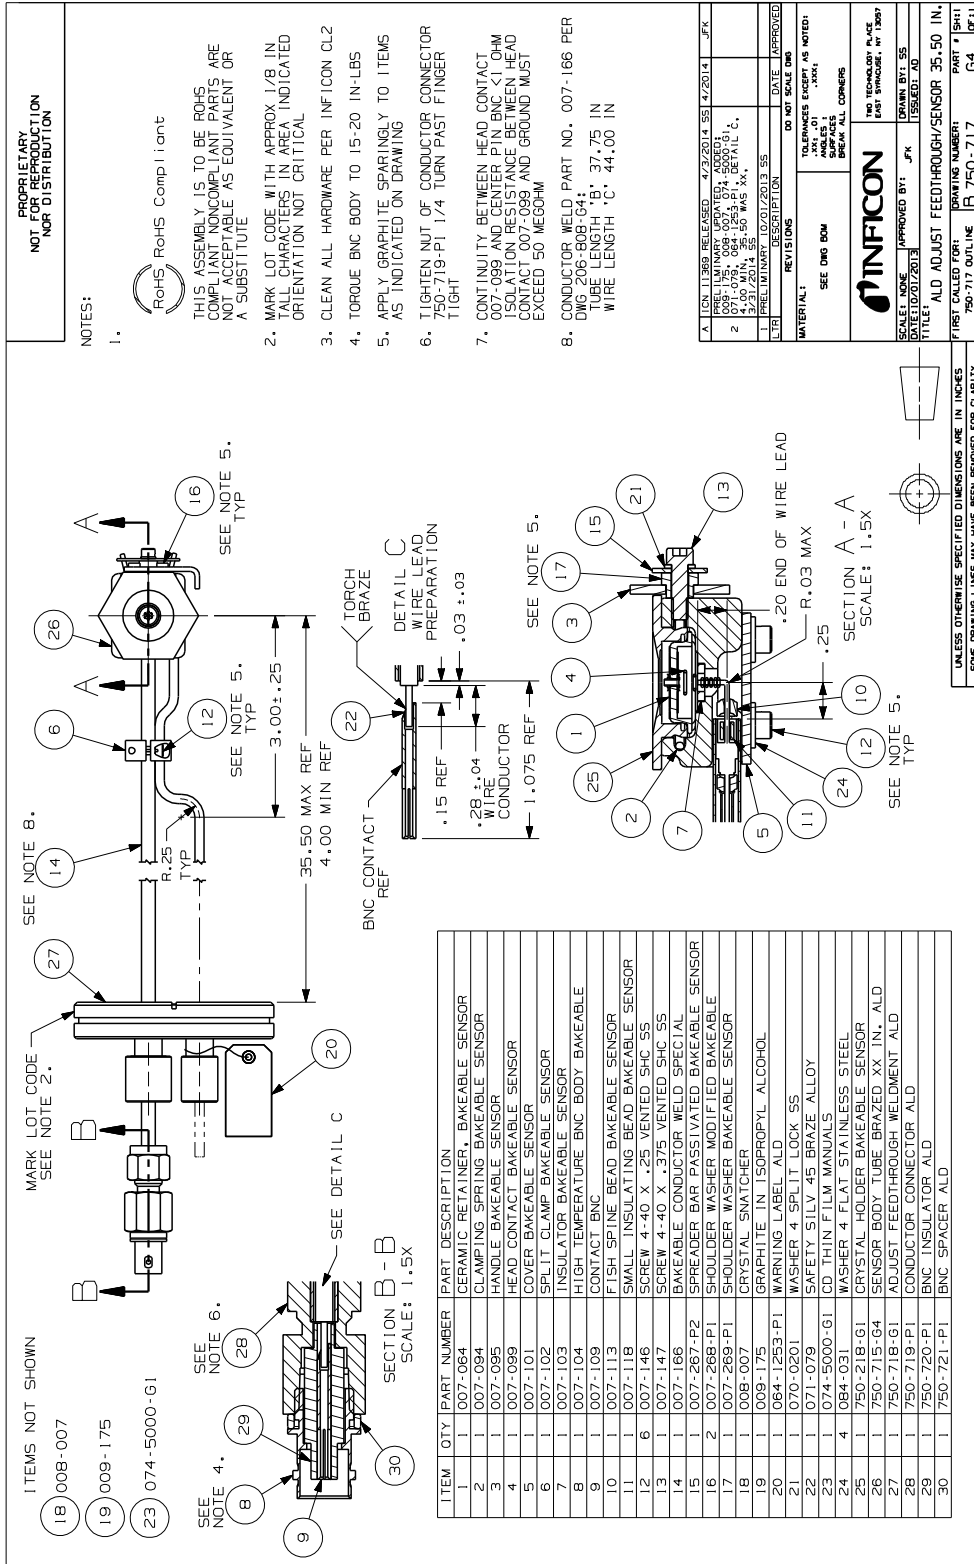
Adjustable ALD Sensor (PN 750-717-G4) assembly drawing
